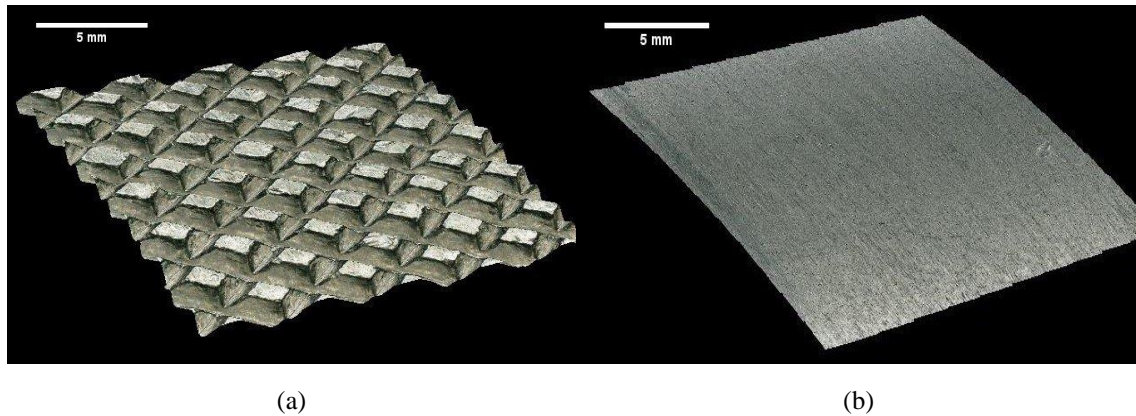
Optical image of a section of the knurled roller surface (a) and the smooth roller surface (b).
